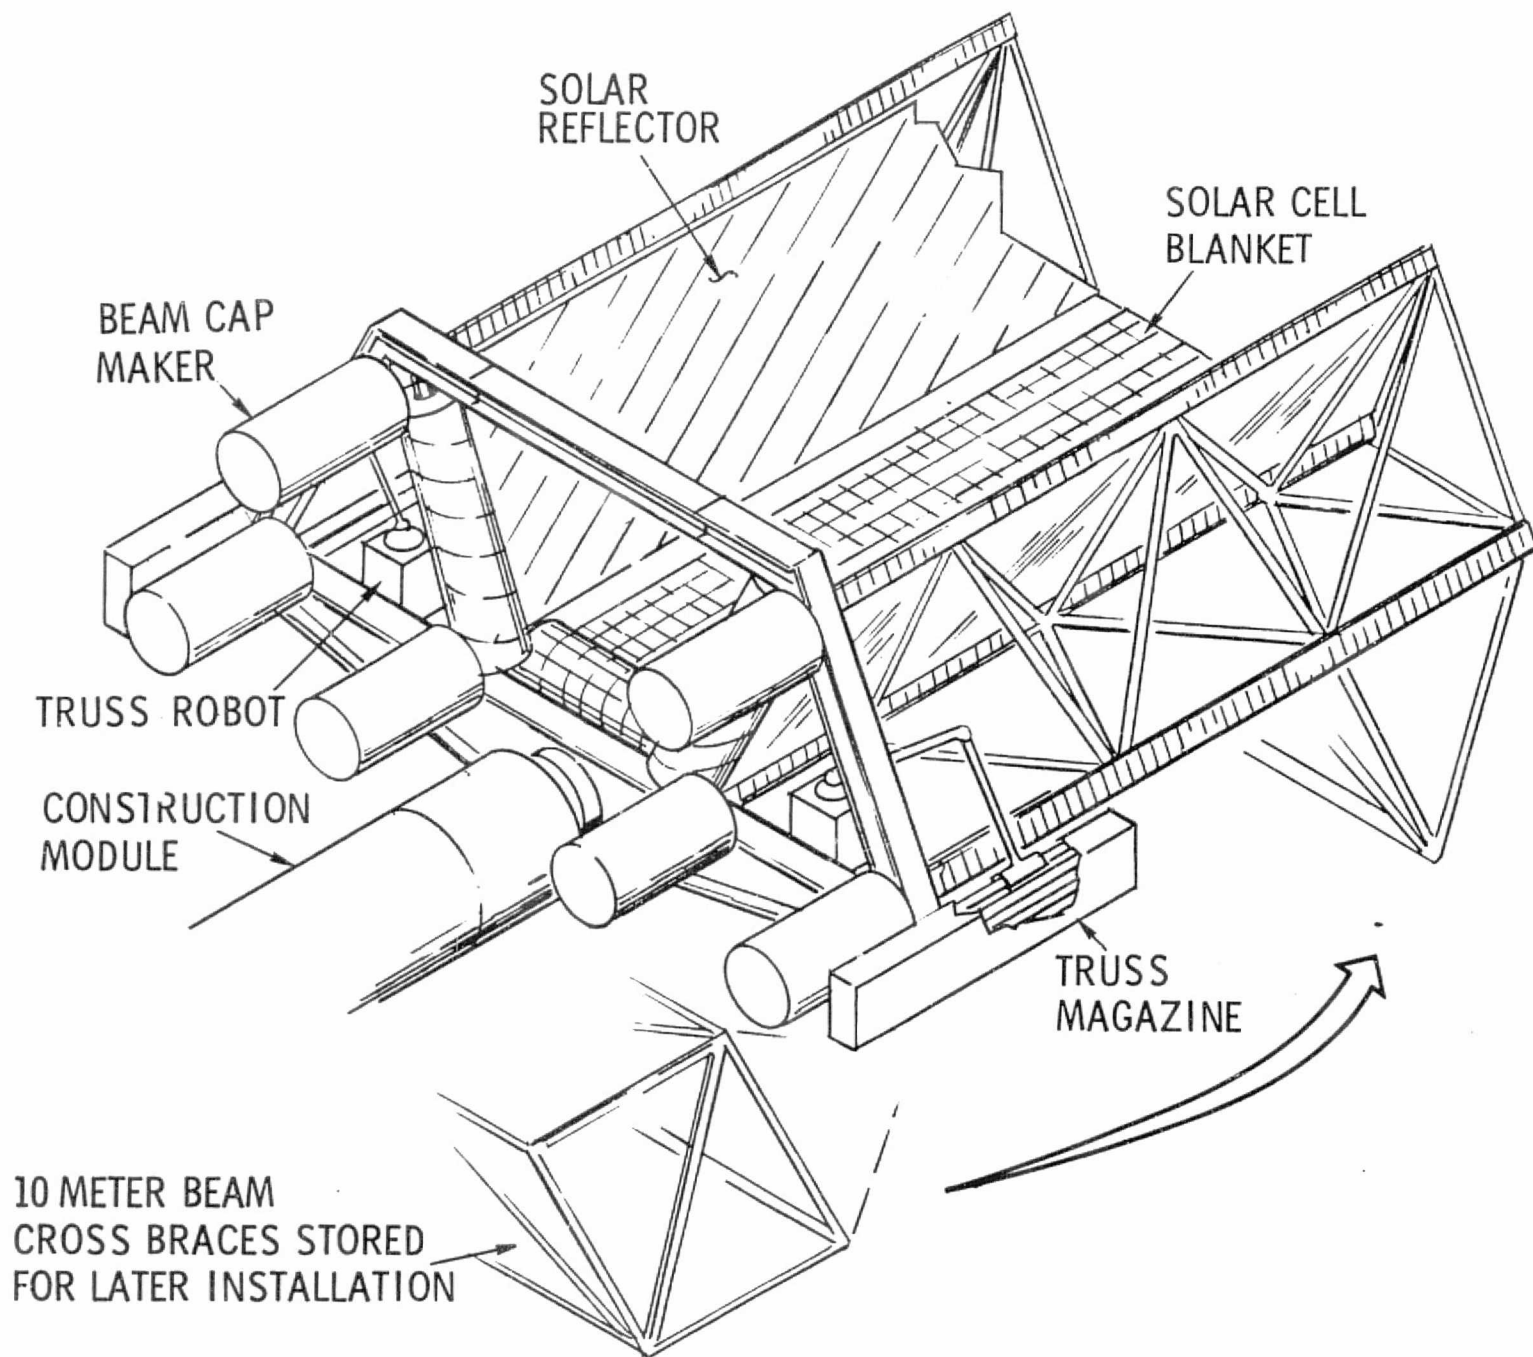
SPS TA-2 Fabrication and Assembly
